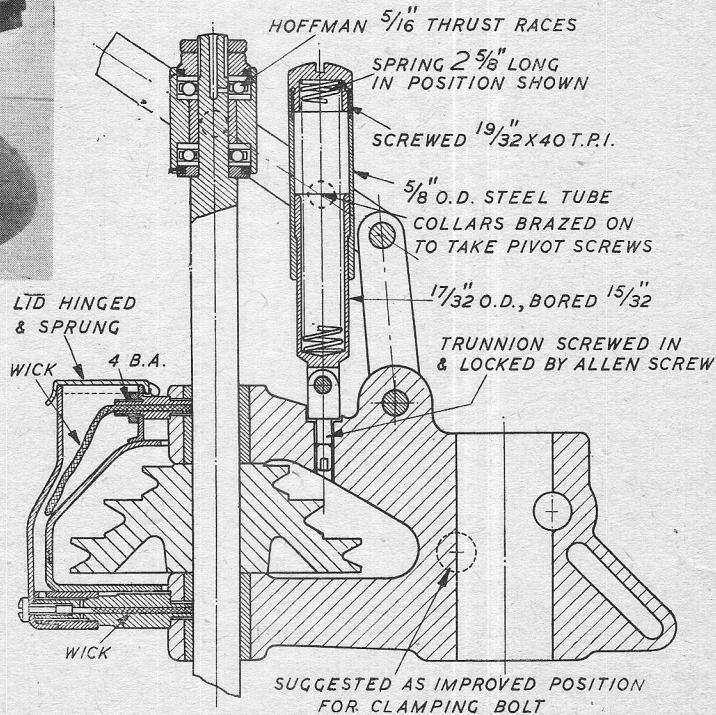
The headstock of Mr. Wedge's machine, showing modified features
